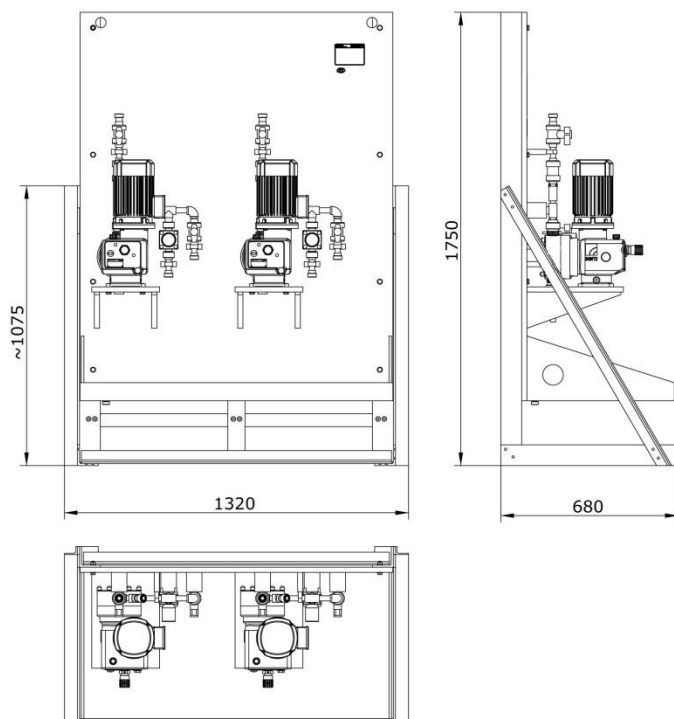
Dimensions of the CVD2 (floor mounting, GFK stand)
